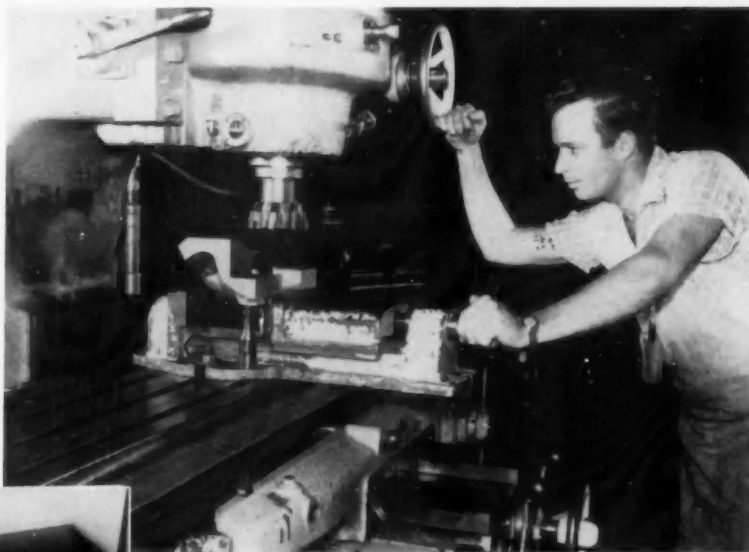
A surface cut is next made on this No. 3 Kearney & Trecker vertical mill to true up tooling surface.
